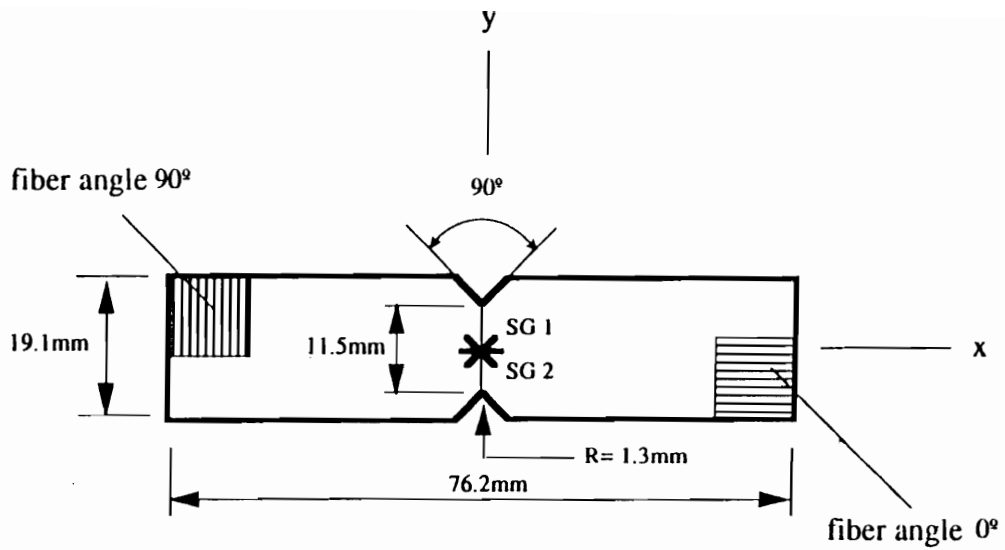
Geometry and dimensions of the Iosipescu shear test specimen.
